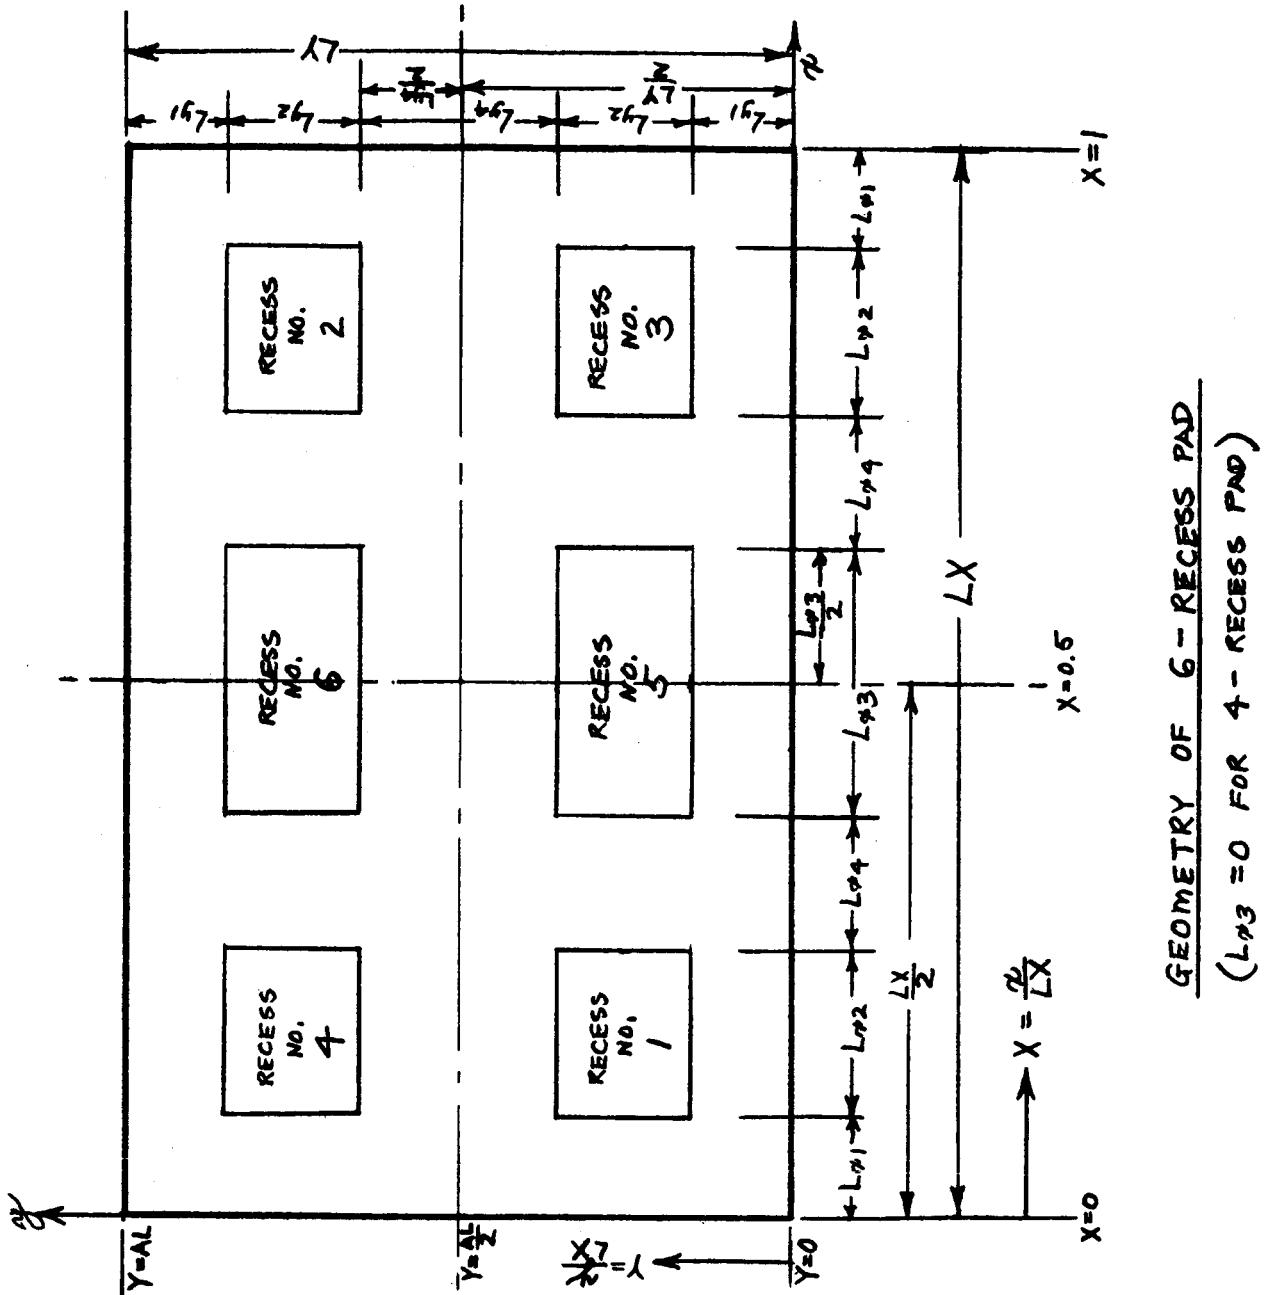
GEOMETRY OF 6-RECESS PAD
